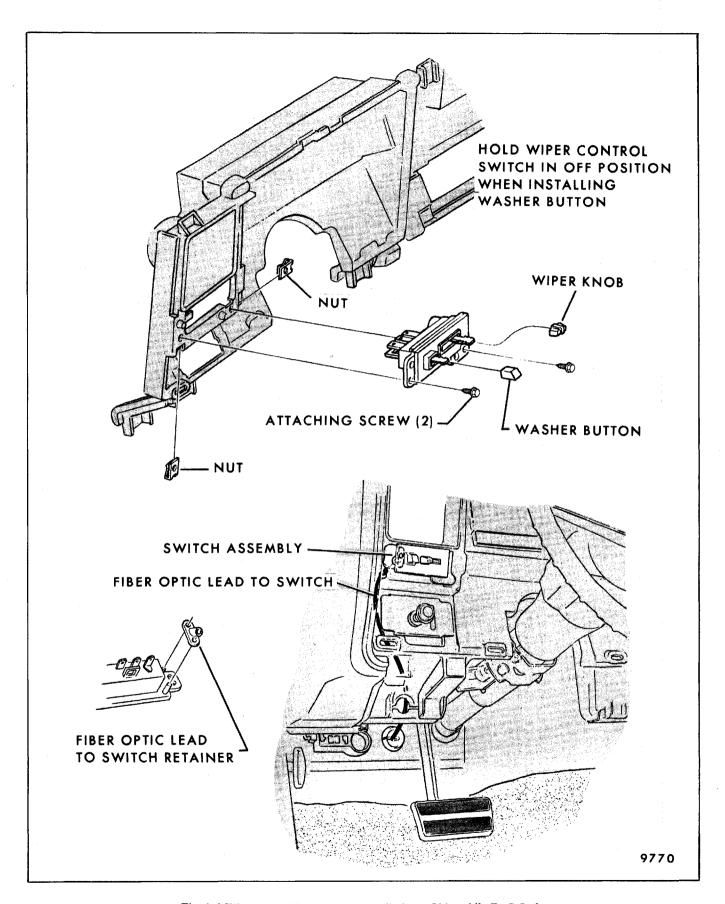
Windshield Wiper Switch Installation - Oldsmobile B, C Styles
